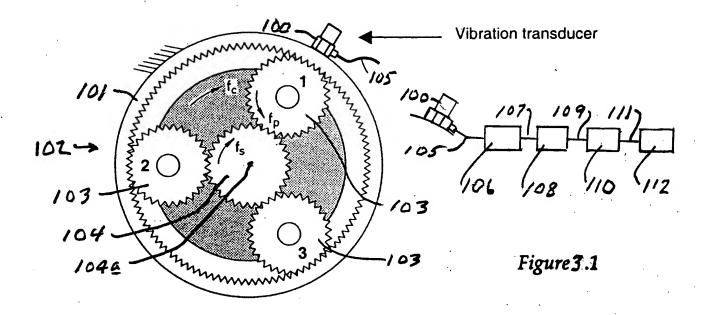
A three-planet epicyclic gear train with a fixed ring gear.
